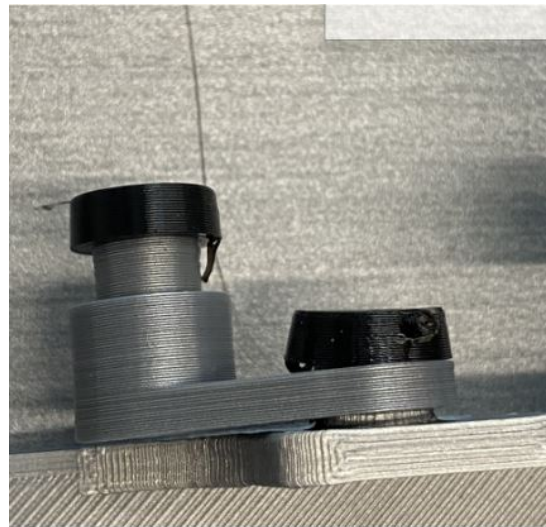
3D printed TPU caps to keep the linkage pieces together.
